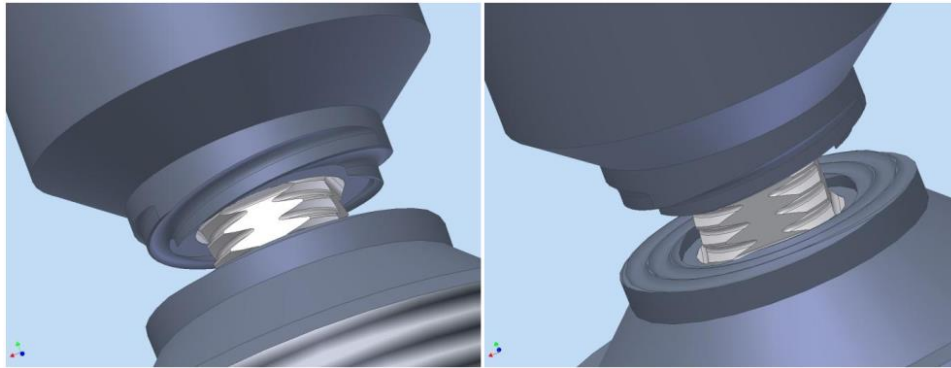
Fixed gap SR-FSW tool for welding thin 5xxx series aluminum, developed by Colligan et al. [80]
